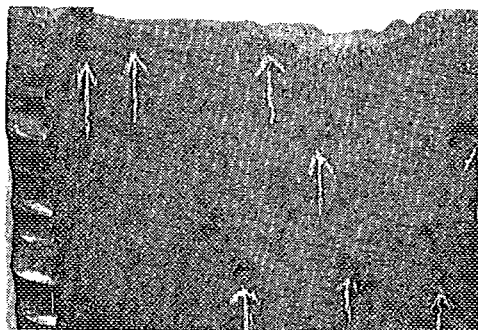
(below) — Cross Section of Fatigue Cracks at Base of Pit in Drill Pipe
